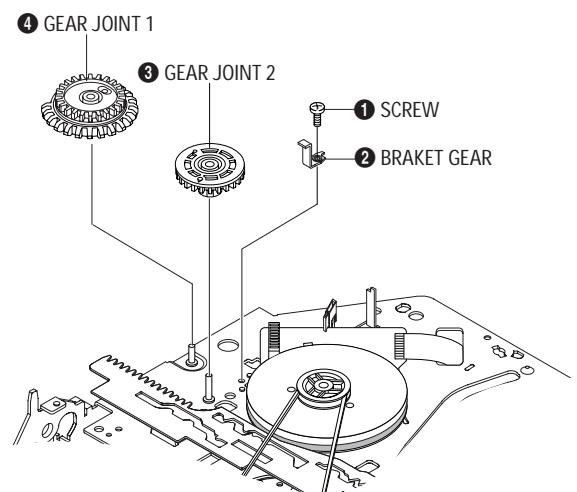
Bracket Gear, Gear Joint 1,2 Removal
